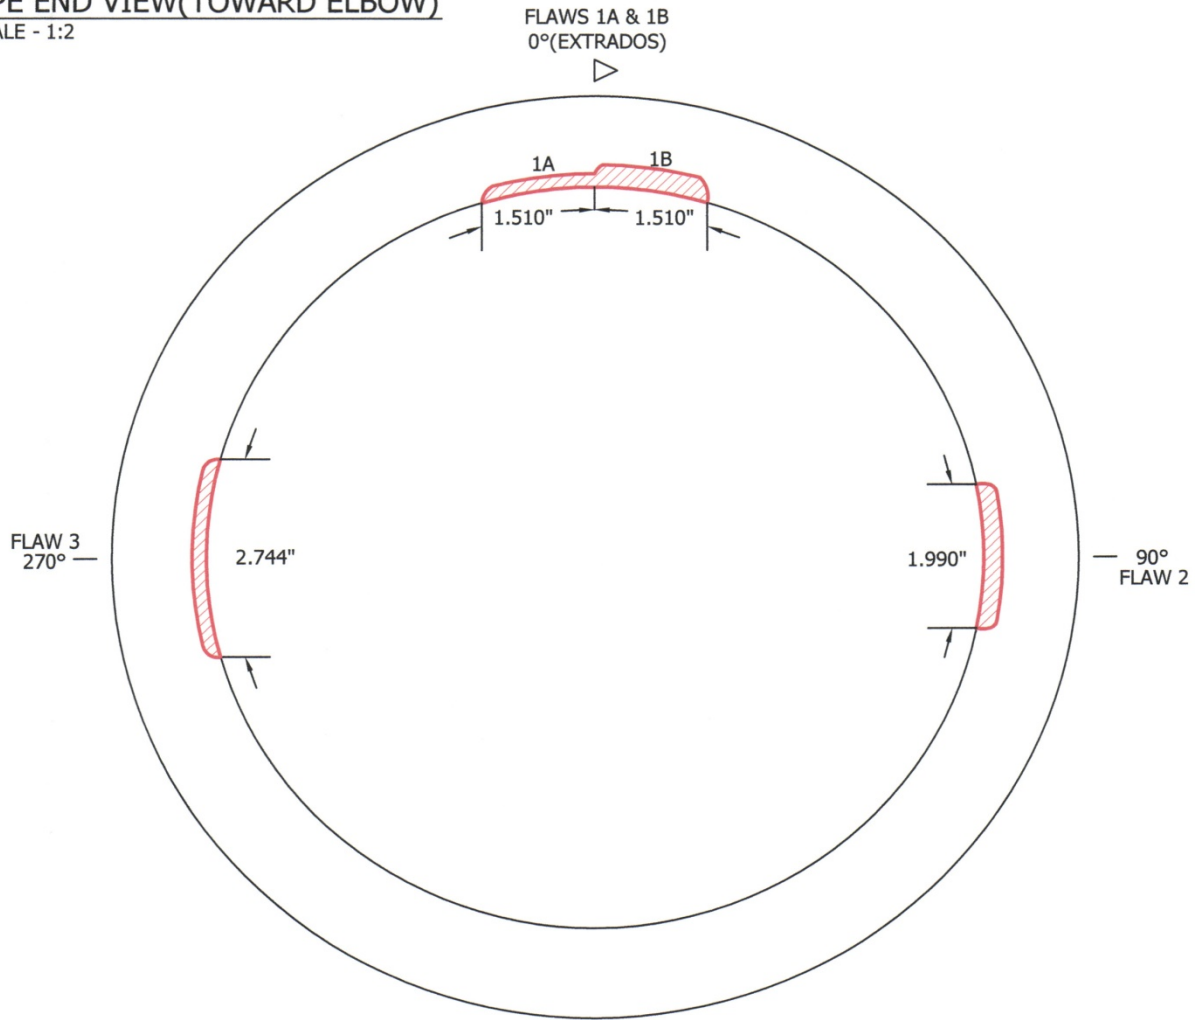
End View Illustration of All Four Thermal Fatigue Cracks Implanted into PZR CASS Specimen 9C-002 (courtesy of FlawTech, Inc.)
